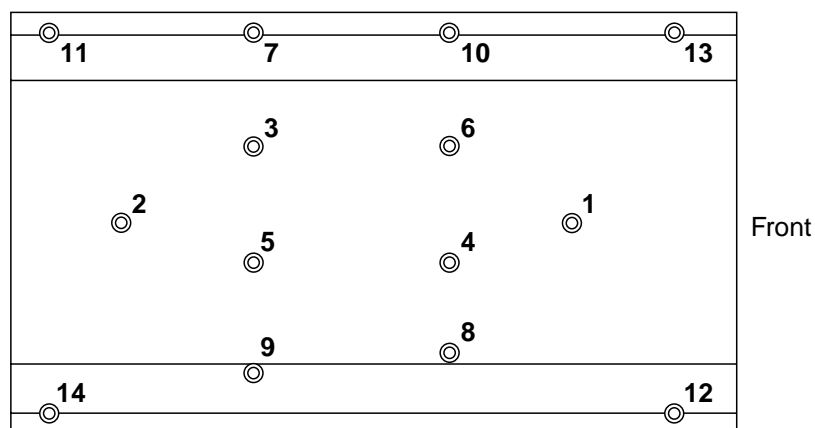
Receiver/Transmitter Bottom Cover Screw Tightening Order
